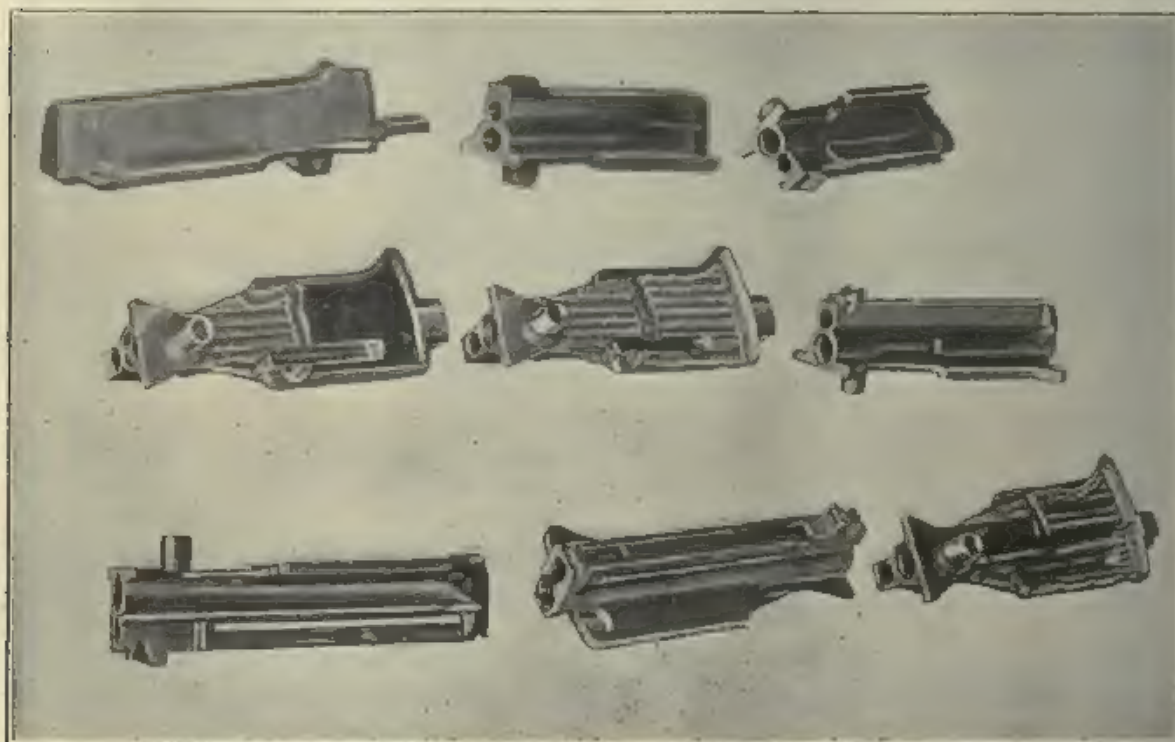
THE RECEIVER FROM DROP FORGING TO COMPLETED PIECE
